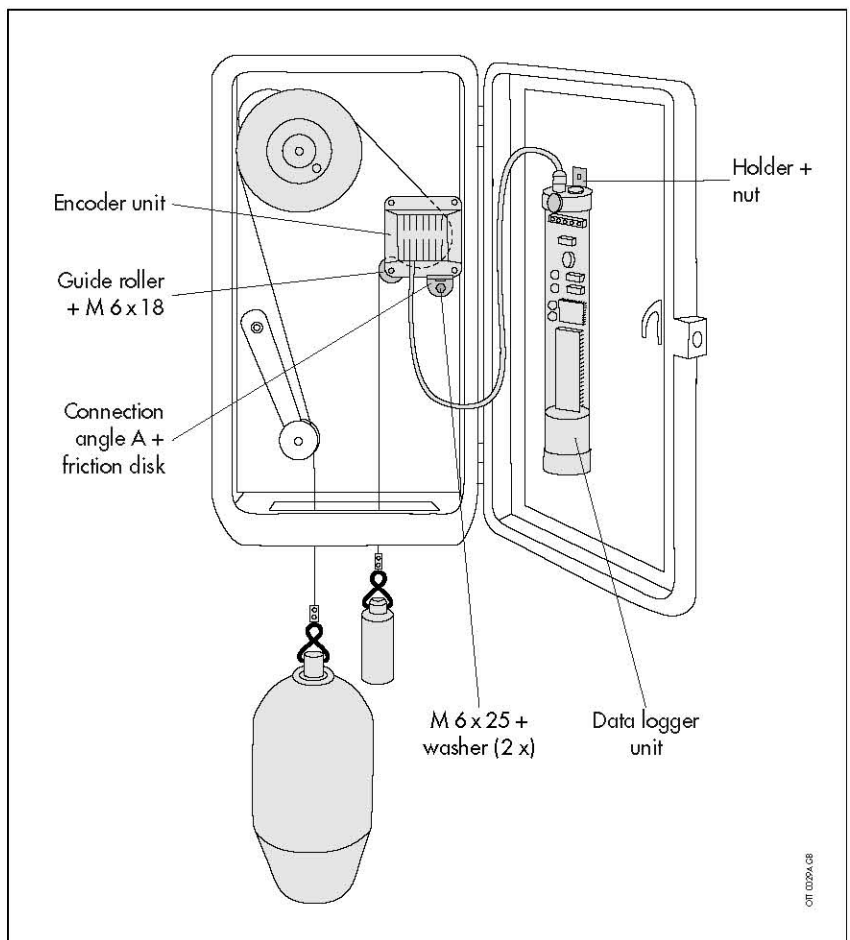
Example of attachment to Strip-Chart Recorder from another manufacturer
